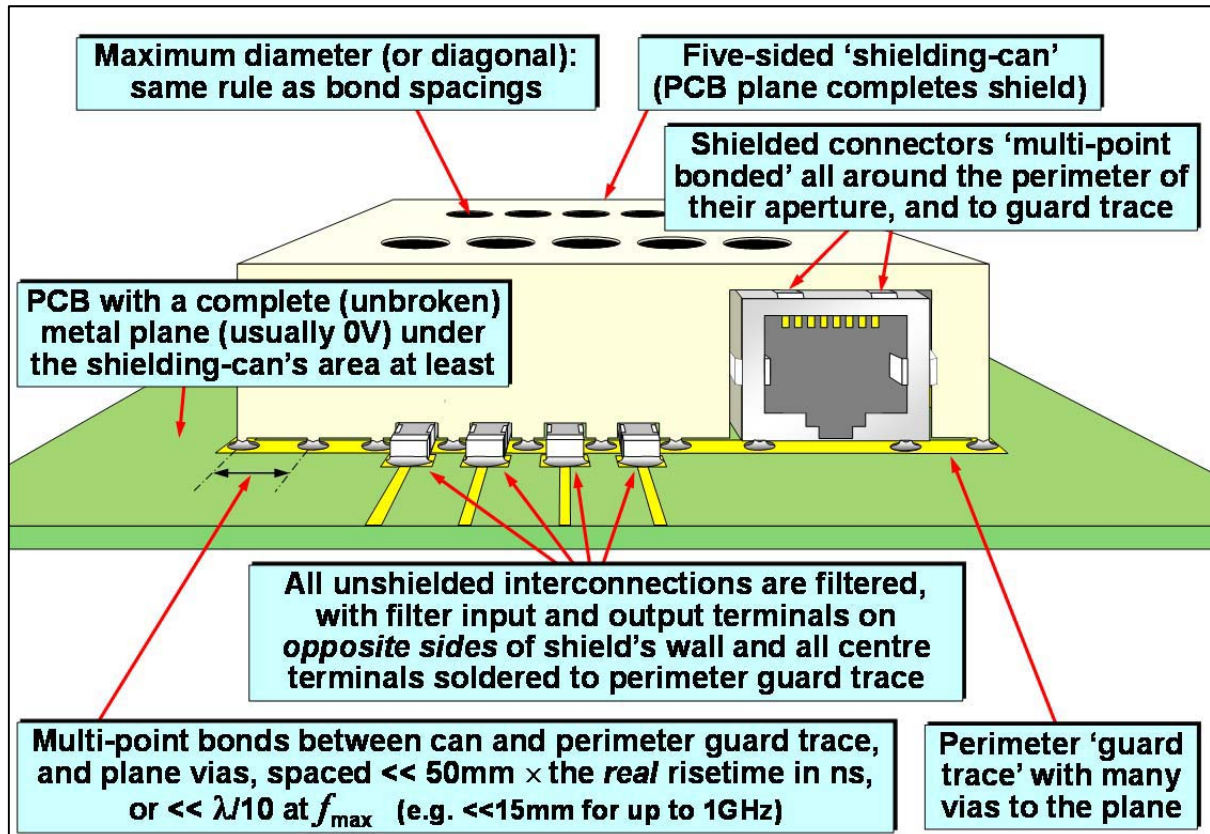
Overview of good EMC design by combining PCB shielding with filtering
